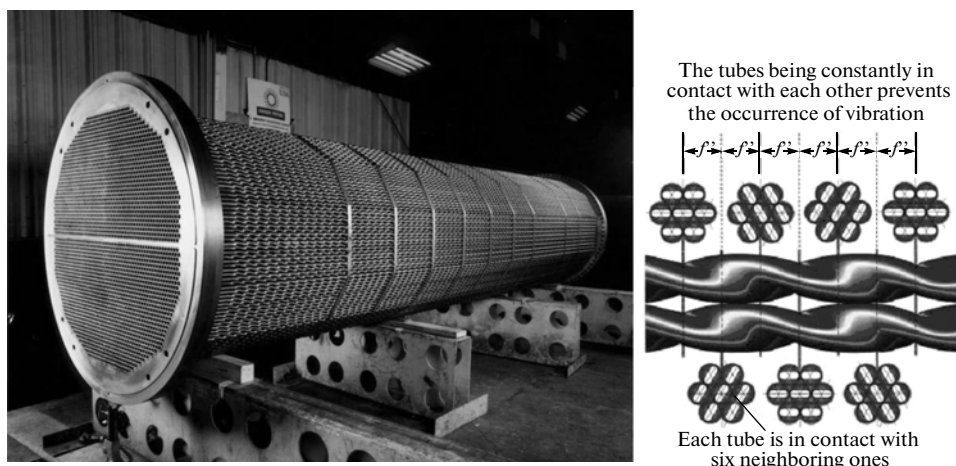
Heat-transfer matrices of shell-and-tube heat exchangers equipped with twisted tubes produced by the Brown Fintube Company and the layout of adjacent tubes in a bundle of twisted tubes.
